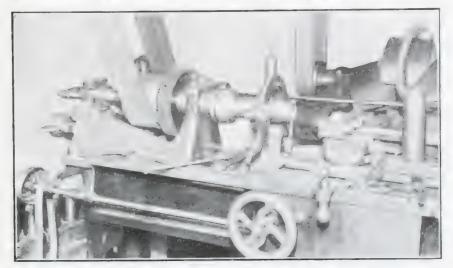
FINISHING NOSE OF LUSE SOCKET ON LATHE WITH SURGEL DRIVE.
